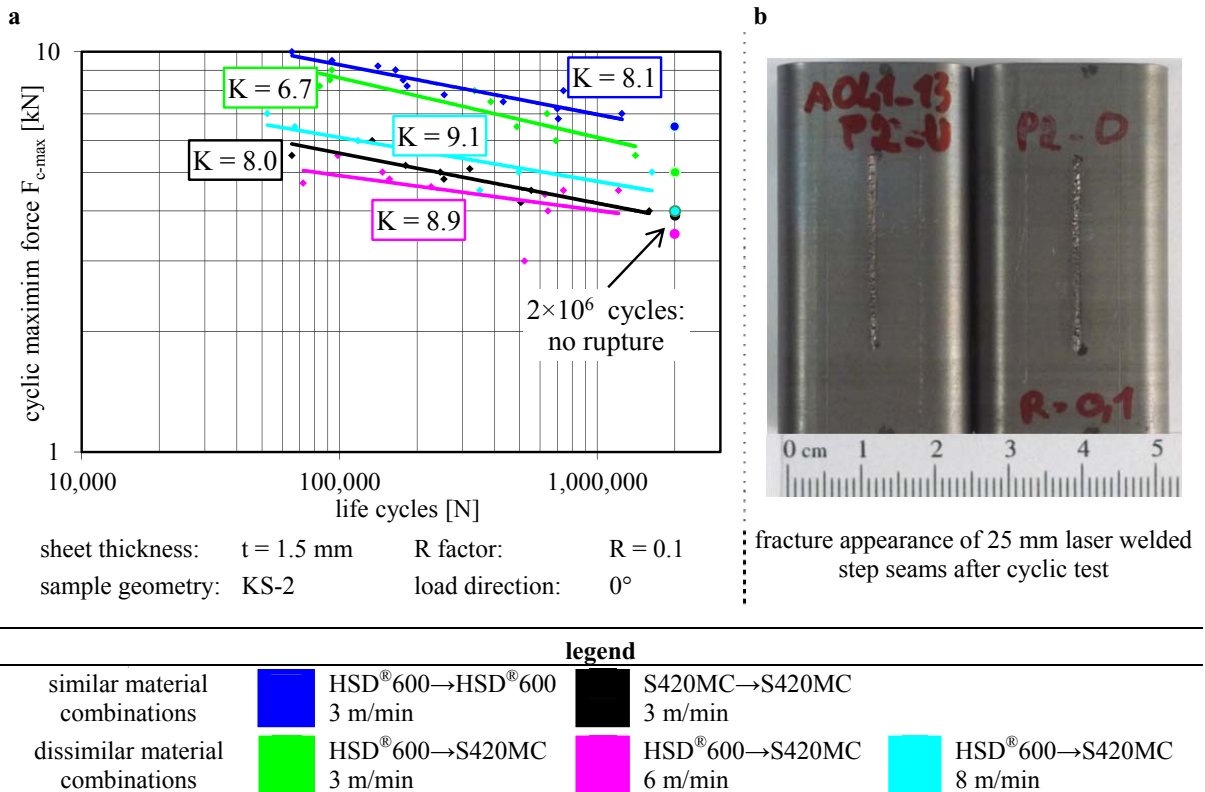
(a) Wöhler curves of different material combinations; (b) exemplary fracture appearance of similar welded HSD[®]600 after cyclic test.
